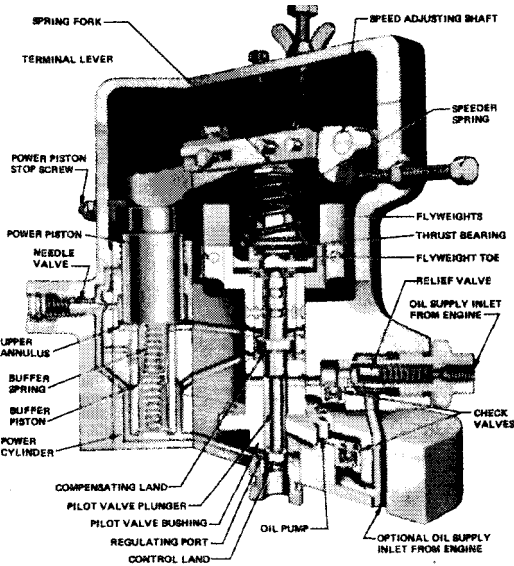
Cutaway schematic of basic PSG mechanical hydraulic governor (Courtesy: Woodward Governor Company)
